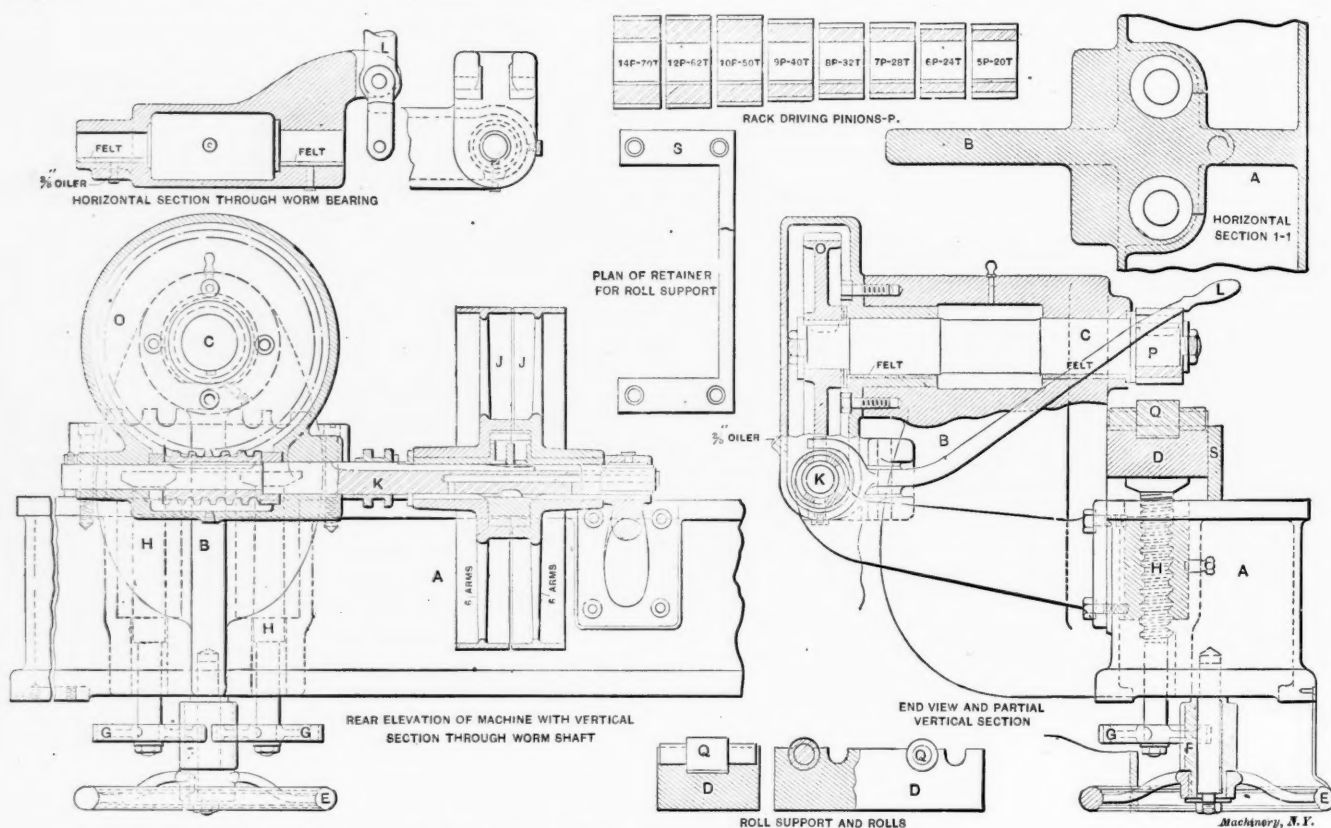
Machine for Straightening Cold-rolled Steel Racks.
